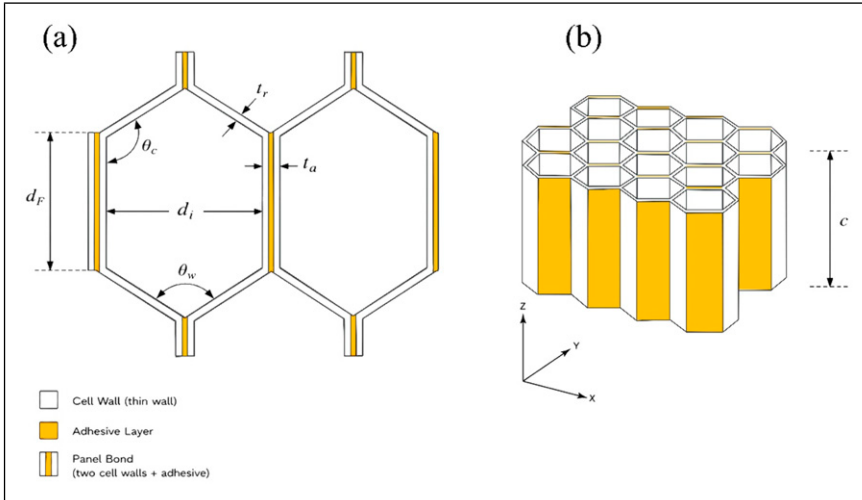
Geometry of the honeycomb unit cell: (a) top view and (b) isometric view of the honeycomb core.
